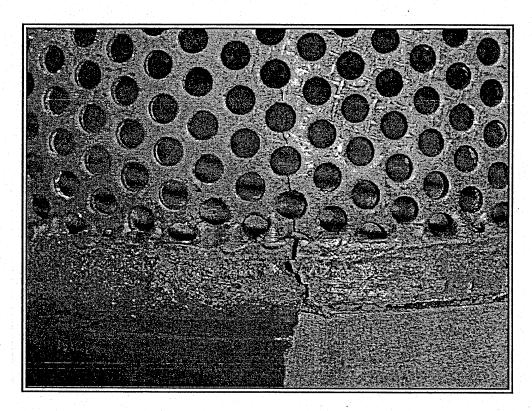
Photograph of the flange cracks in the witch's hat strainer
